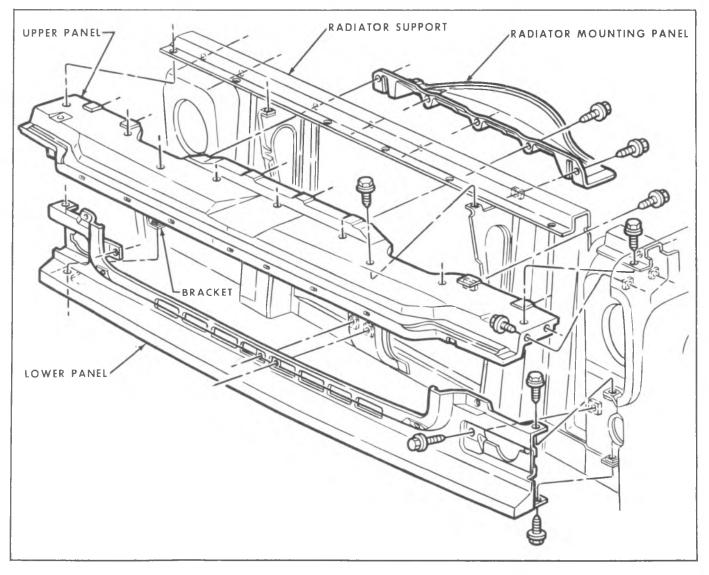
C-16-Radiator Upper and Lower Grille Panels-CK Series
